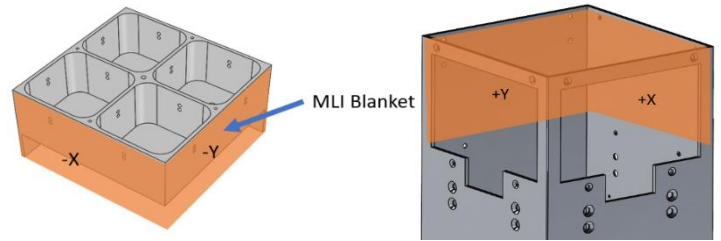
MLI blanket sheet shown on the housing (left) and CubeSat structure (right).
